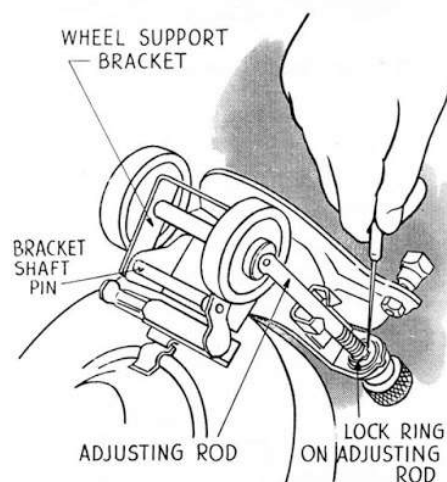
Removing split lock ring from adjusting rod on Models 1-300-425-450-475
